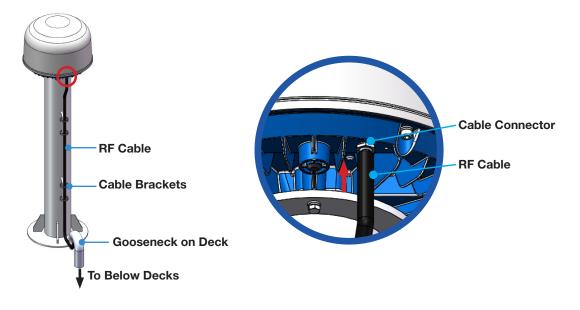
Connecting RF Cable using Inner Holes (with M6 Bolts)
